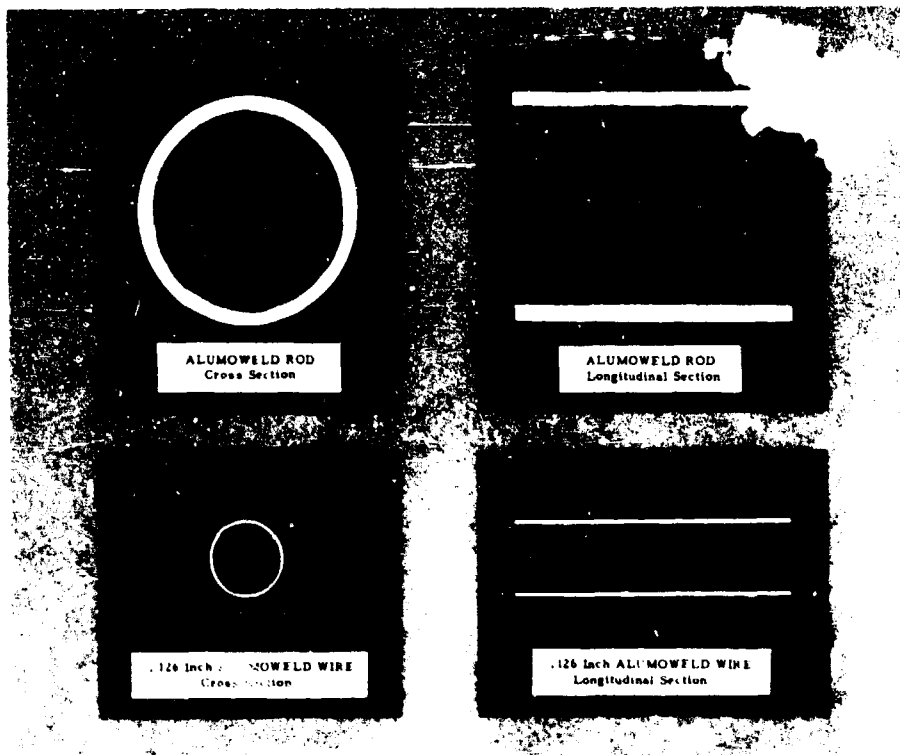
Proportion Of Aluminum And Steel Remains The Same After Drawing Alumoweld Rod Into Wire.
